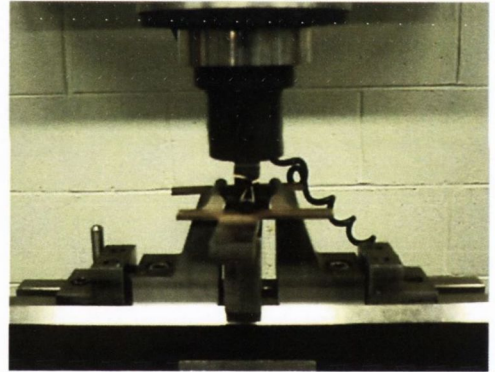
showing gauge blocks fitted between the upper roller & the lower rollers.
